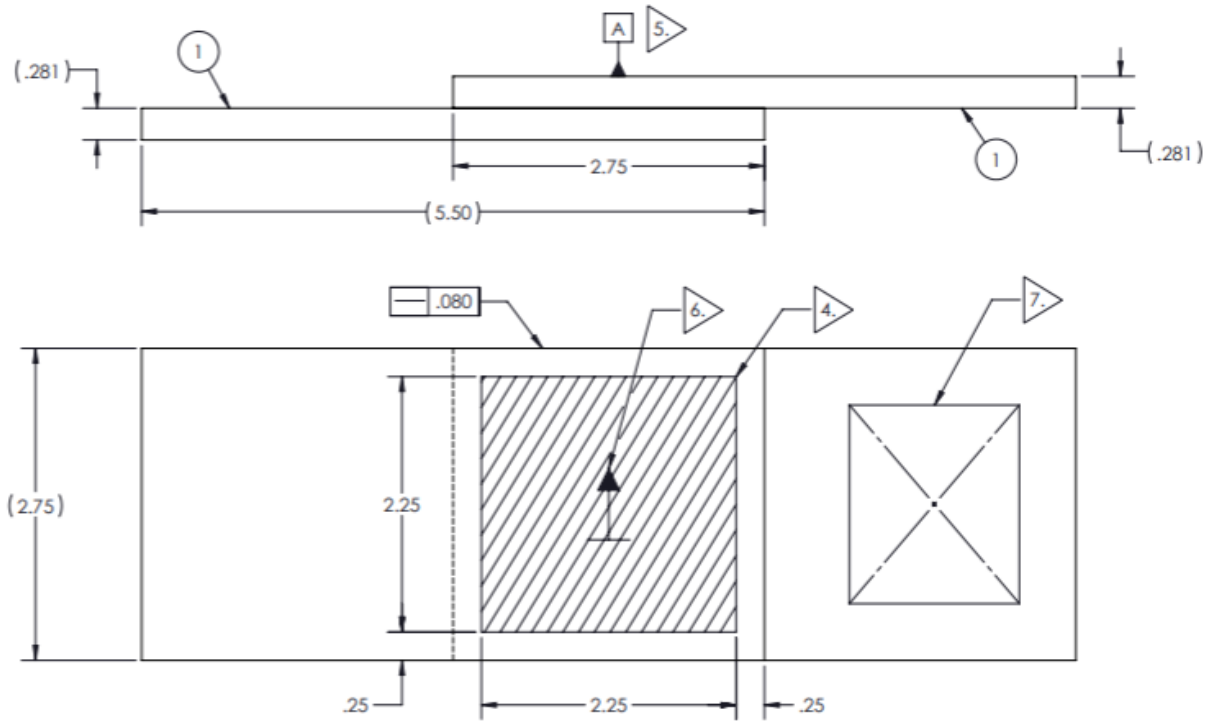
Weld setback specimen configuration, excerpt from drawing TDEA-275. Item 4 identifies the 2.25 in. x 2.25 in. target weld area. All dimensions are in inches.
